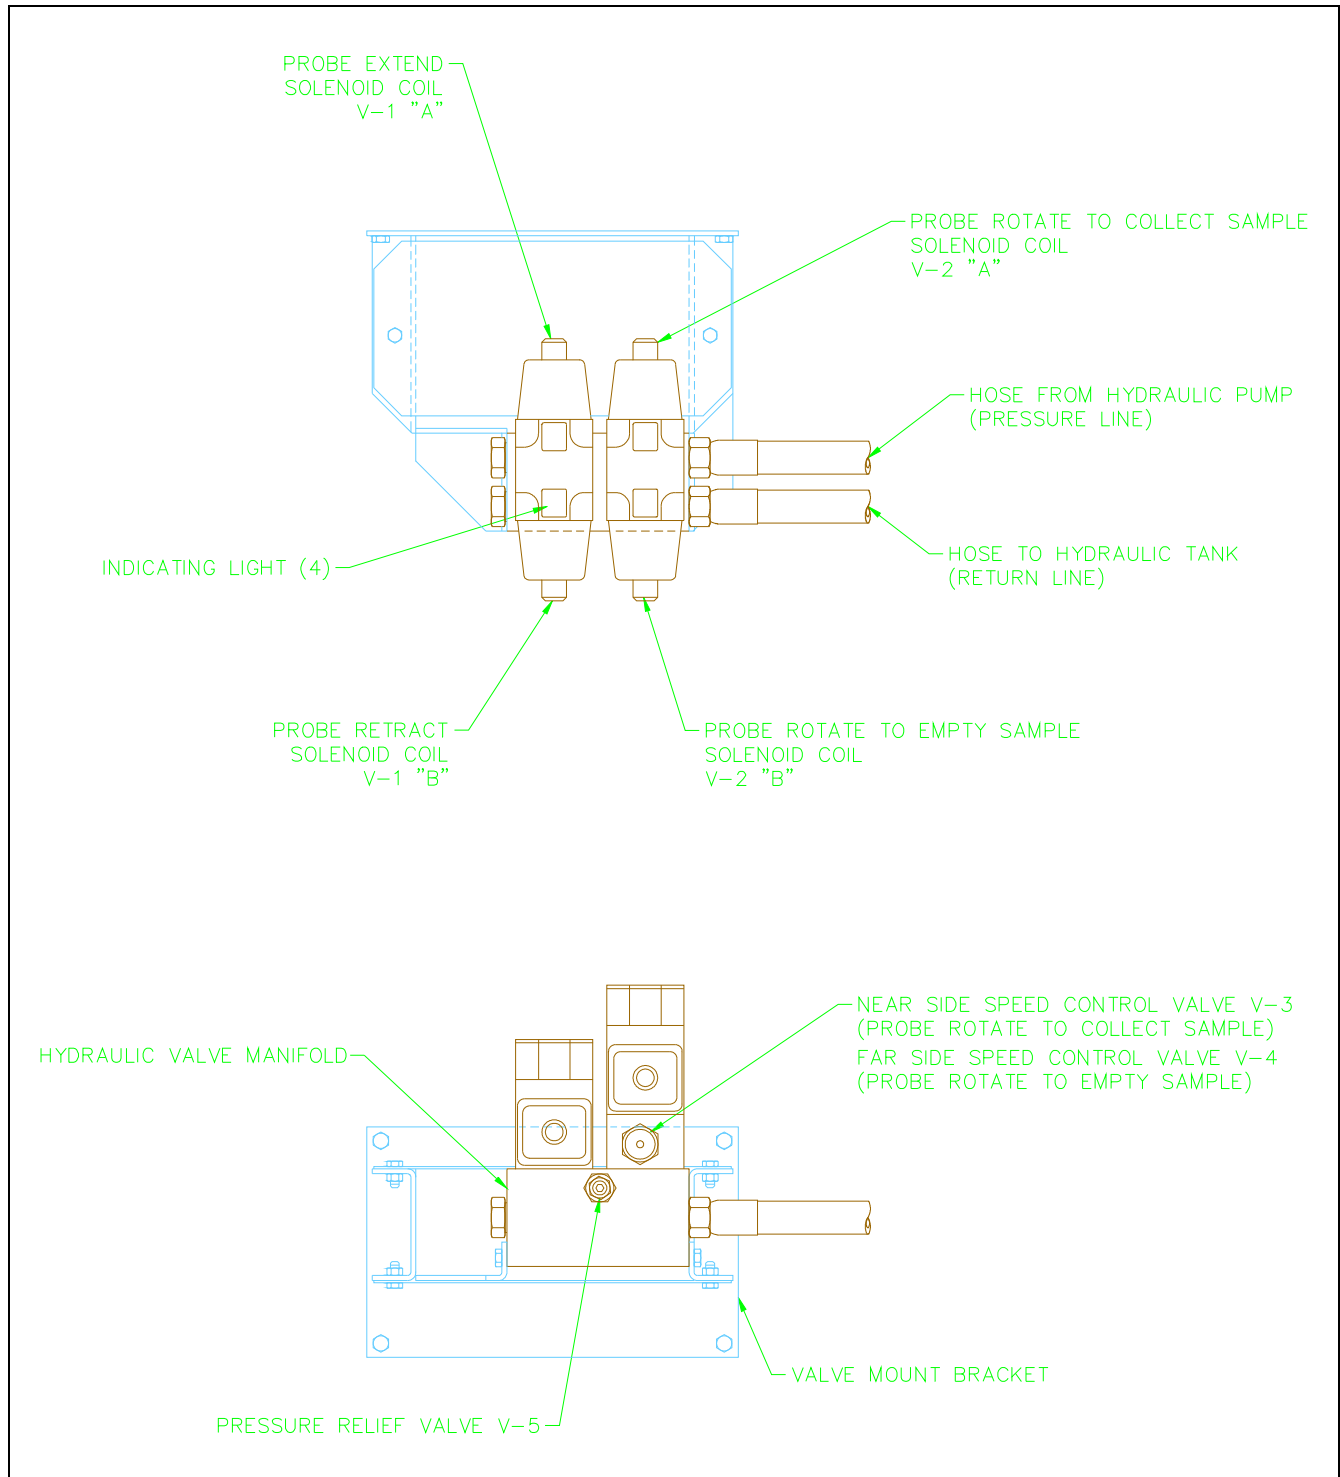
, HYDRAULIC VALVES & MANIFOLD
